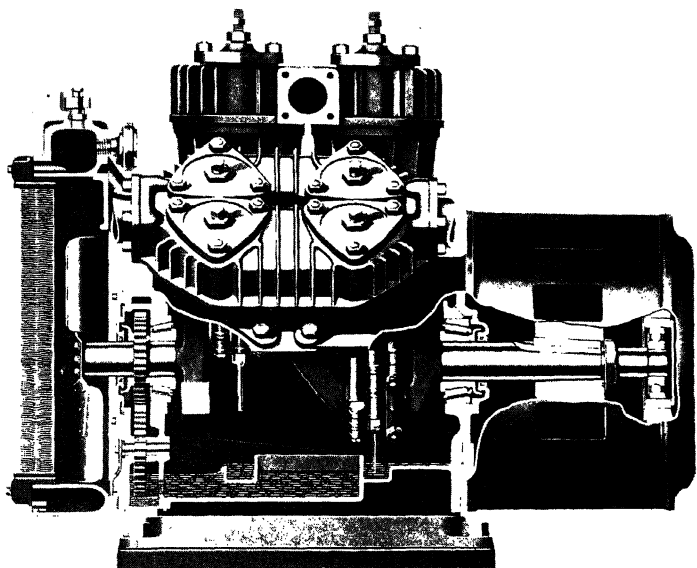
Two-stage air compressor with all bearings splash oiled. (*Courtesy Ingersoll-Rand Co.*)
